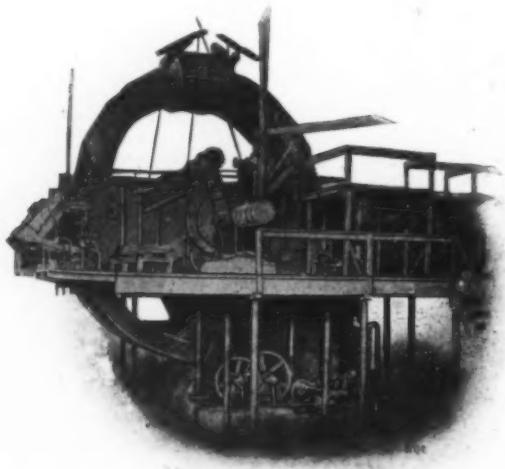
MECHANICAL PUDDLING MACHINE.
